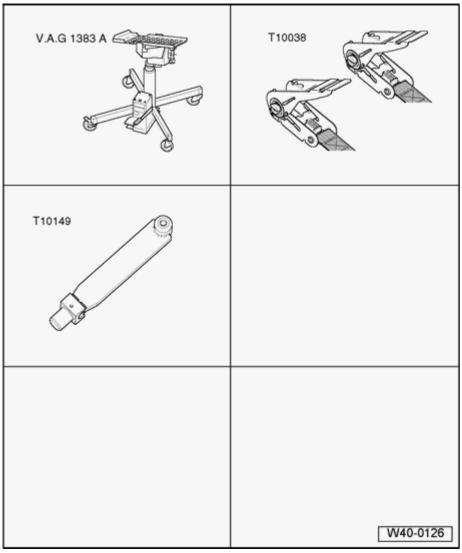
Identifying Special Tools - Axle And Wheel Bearing Courtesy of VOLKSWAGEN UNITED STATES, INC.
